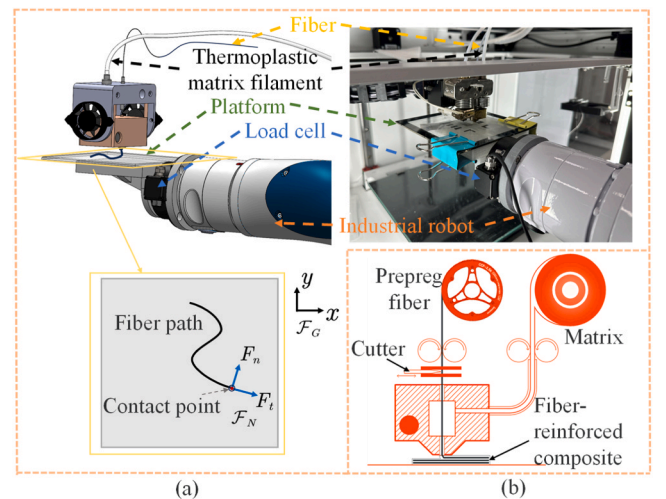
Experimental setup. (a) Designed, fabricated, and assembled experimental platform with an industrial robot and load cell, and (b) schematics of co-extrusion system.
